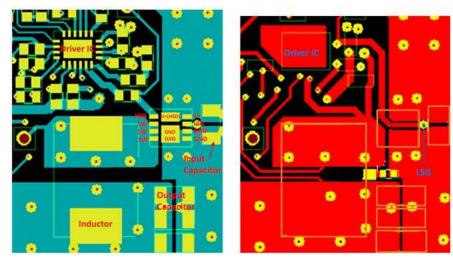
Top/Component (green) View and Bottom (red) PCB View
